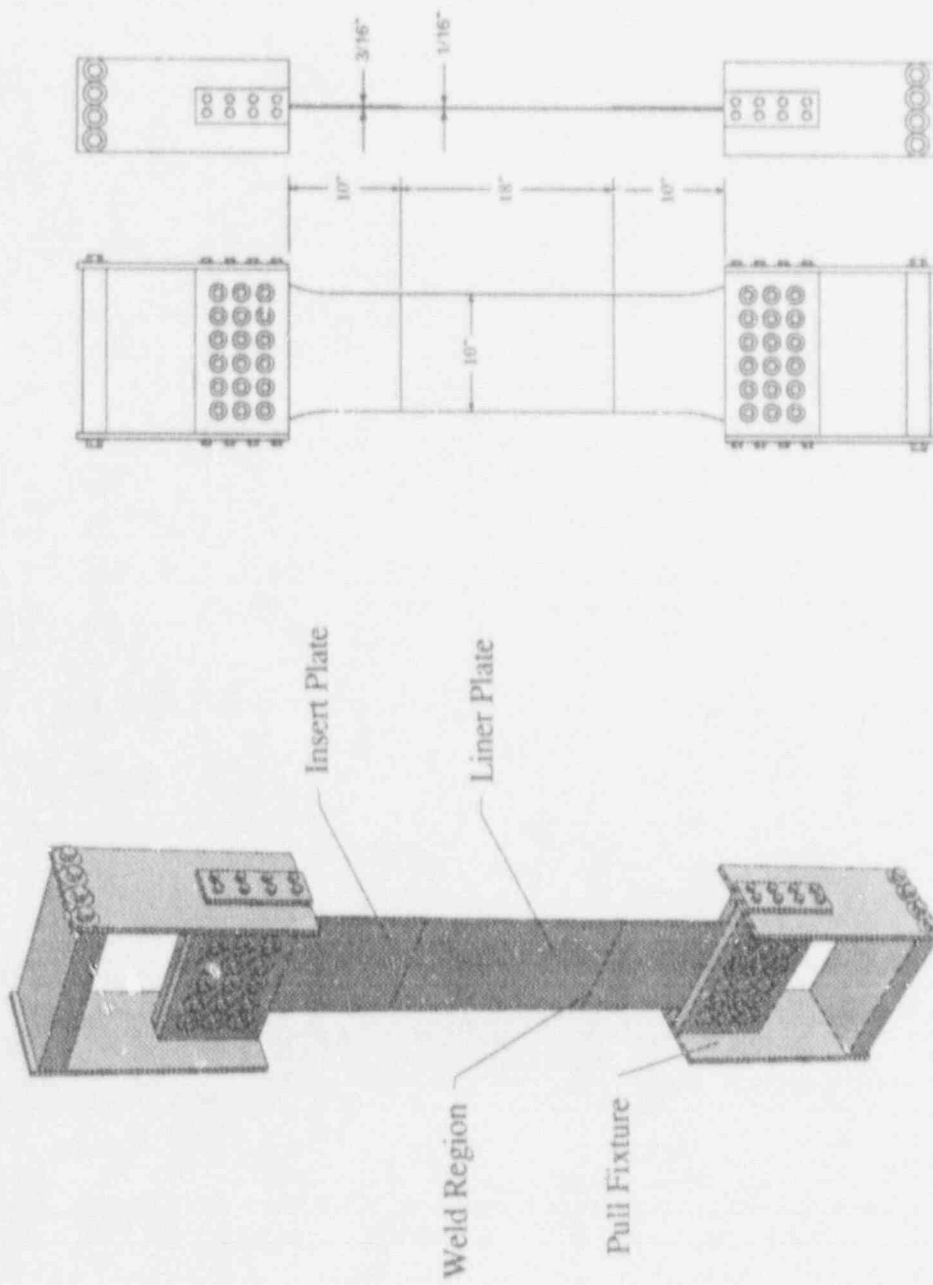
Specimen For Weld Effects Testing (Phase 2A)
